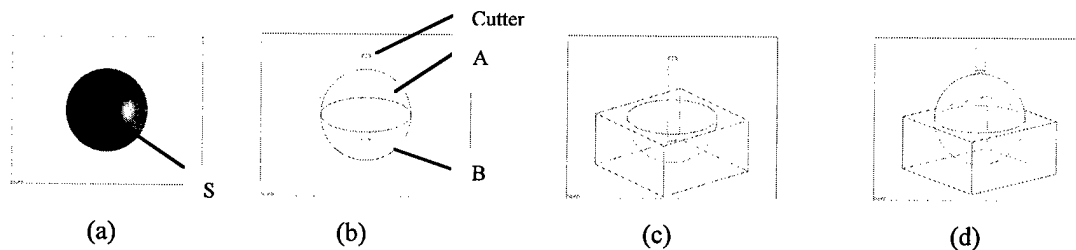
(a) Sphere S (b) Surfaces A and B on the sphere (c) Machine Surface B (d) Machine Surface A
